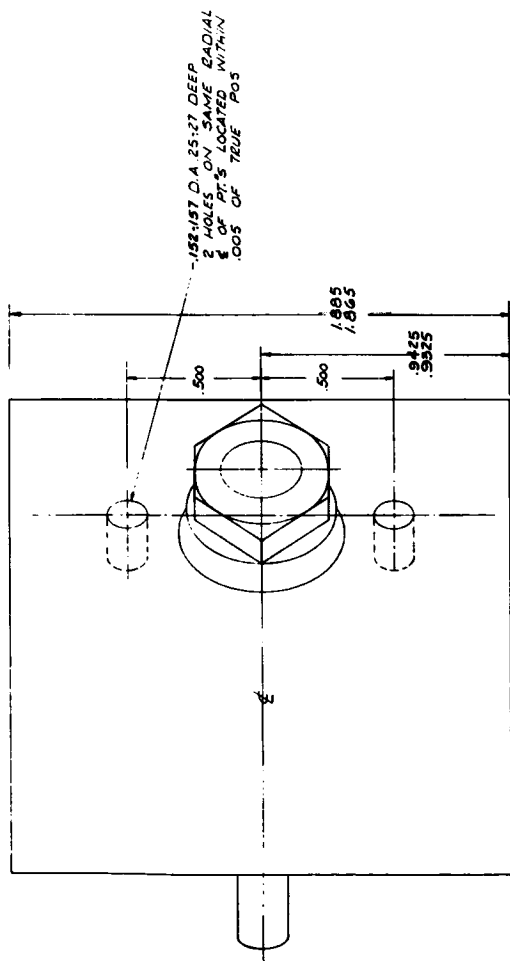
Bently Combined Probe Calibration - Gauge 8 and 8R.
